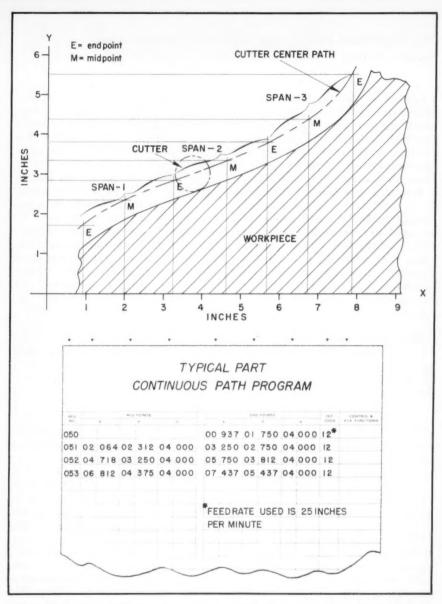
Engineering drawing and program manuscript for simple continuous path profiling operation. The program is written for a control unit with a parabolic interpolator.
